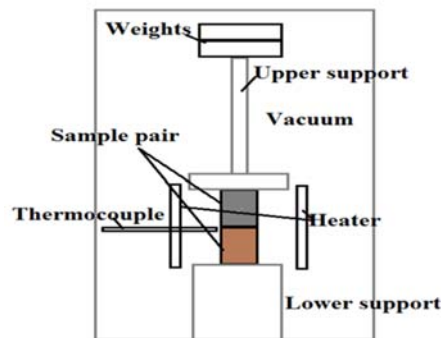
A schematic illustration of diffusion welding furnace.
